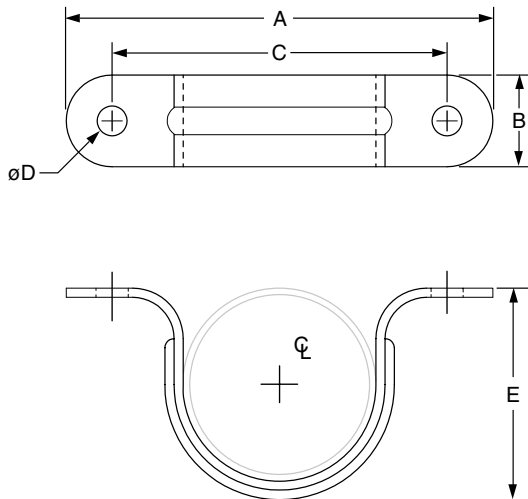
DIMENSIONS (IN) • WEIGHTS (LBS)
